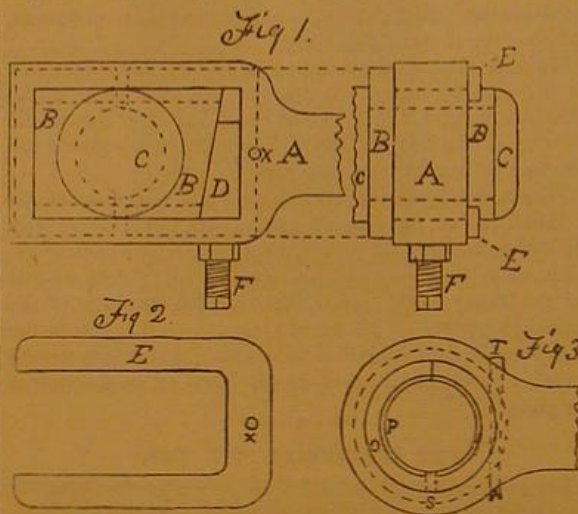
shows a good substantial form for the ends of parallel rods; the outer ring, O, must be large enough to let the collar of the wrist pass easily through the eye in the rod; the ring, P, is simply a lining of hard composition, to take the wear of the wrist and to be renewed occasionally when worn out; the outer ring being secured by a taper pin, T, split at its lower end as shown. The inner ring is kept from turning by a dowel, S. The rings, being in halves, may be first placed upon the wrist, and then the rod slipped upon them, as explained above.
